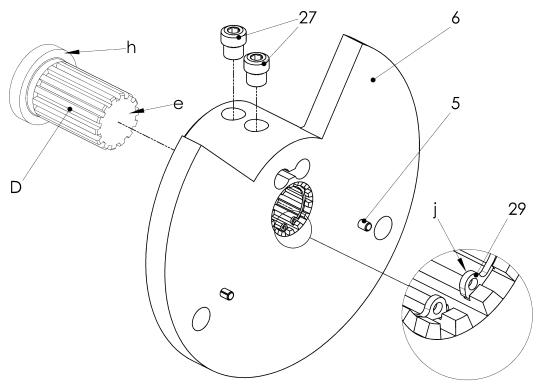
Mounting the hub (6) with CENTALOC clamping
